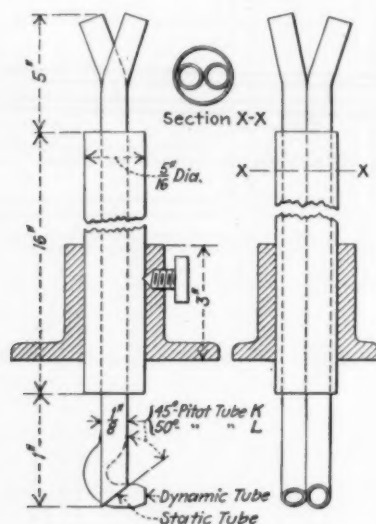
DIMENSIONED SKETCH OF PITOT TUBES K AND L
